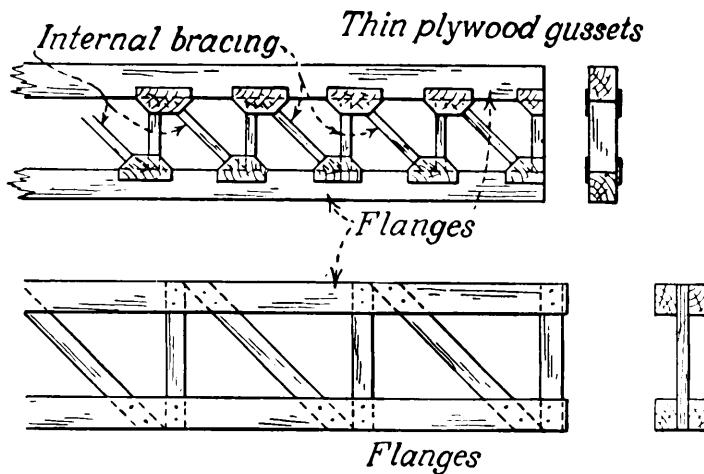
Two types of spar construction. These figures show both an elevation and a cross-section view of each type of spar.
